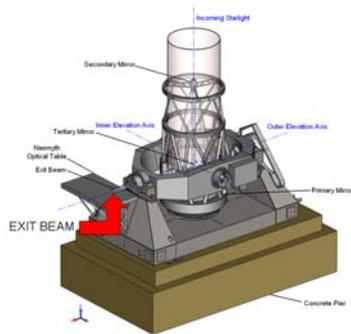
The 1.4m aperture MROI elevation-over-elevation unit telescopes. (Courtesy of AMOS)
